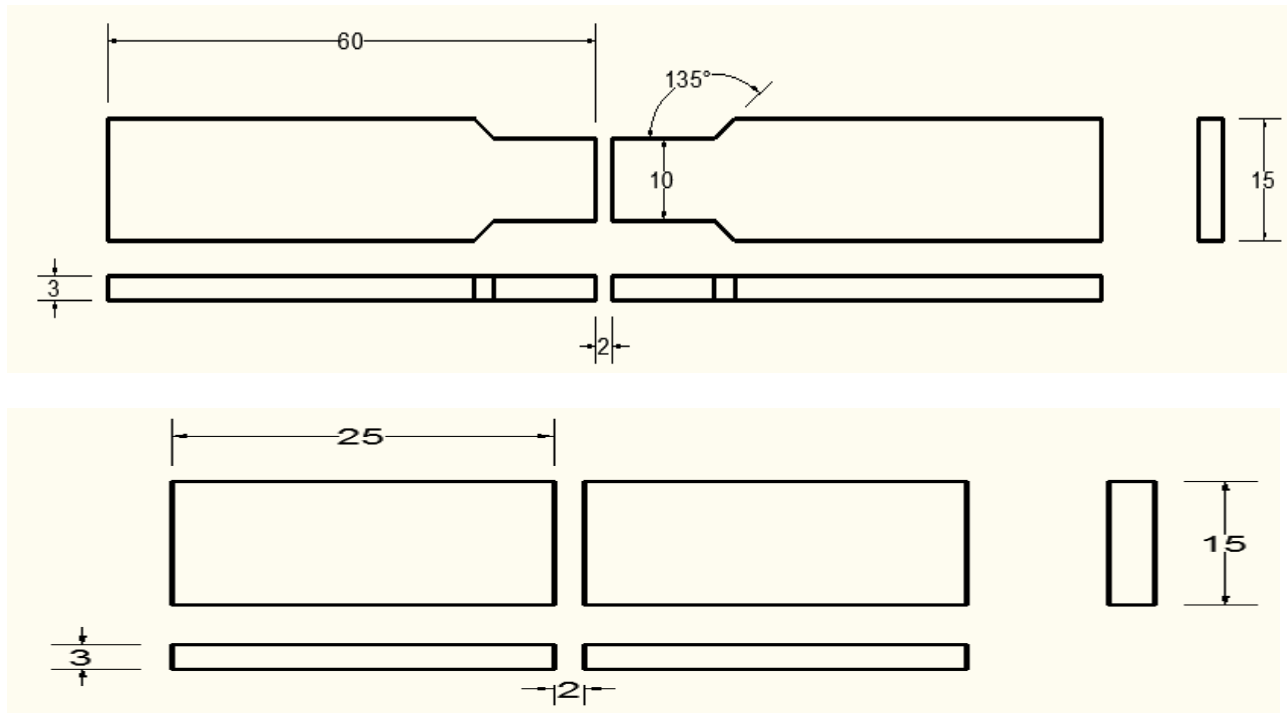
Standard Joint Preparations for plain face sample for welding.
